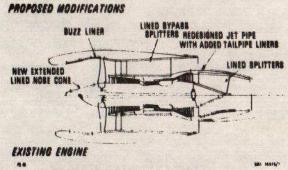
RB211 5 PNdB Quiet Engine Demonstrator
